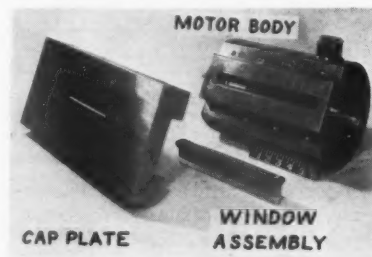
WINDOW MOTOR CHAMBER DISASSEMBLED
